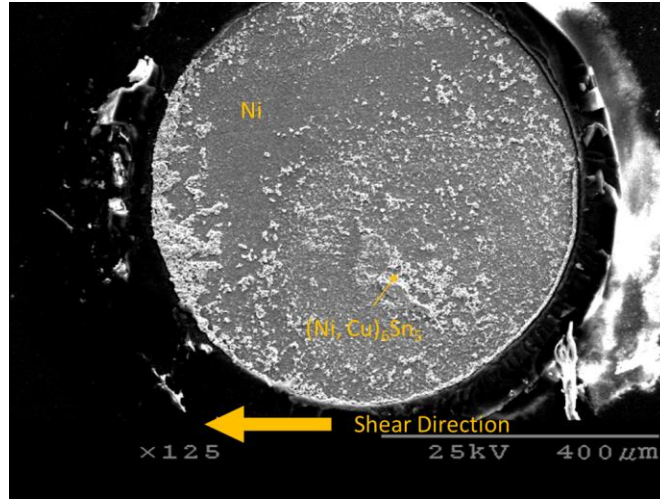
Top view of the fractured surface of the brittle failure for ENIG surface finish
